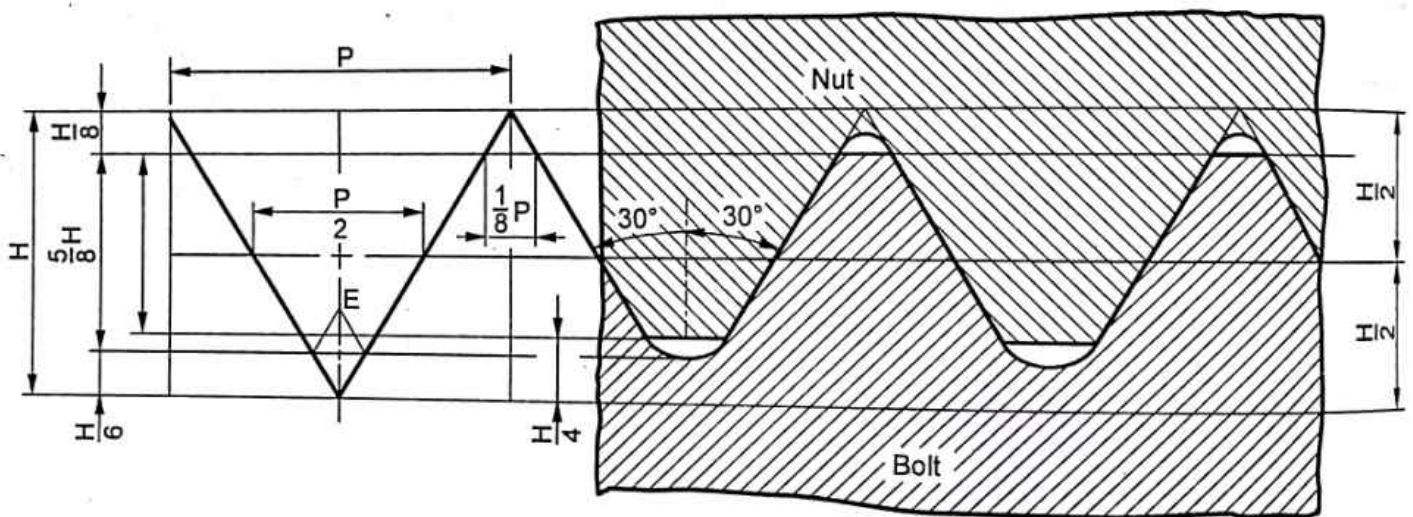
(d-2) ISO metric screw thread design profiles of external screw threads
